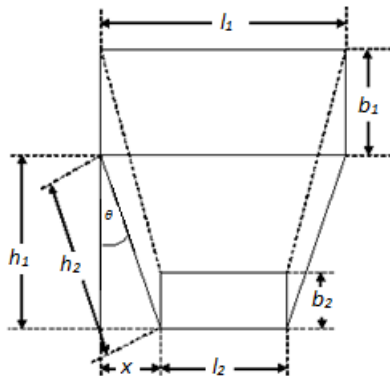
Initial dimensions (without corner & edge radii) of the pyramidal cup
